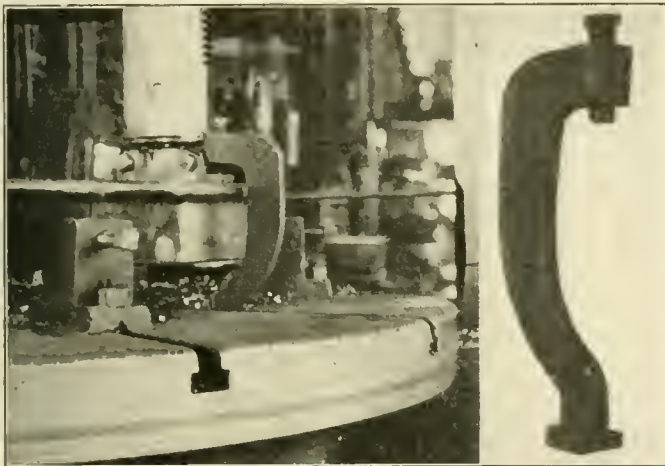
Clamp for Holding Tires on Boring Mill Table
